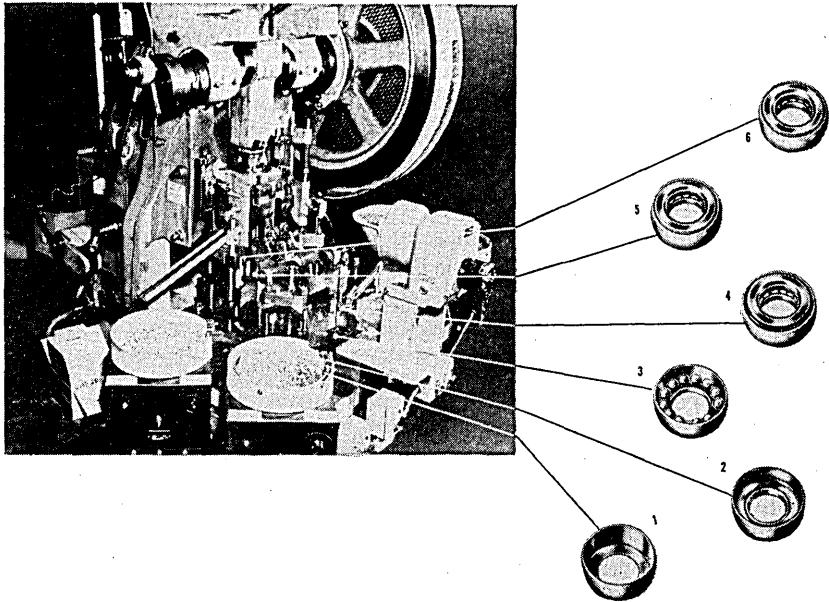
Standard press setup to assemble low-cost bearings (Courtesy New Departure Division, General Motors Corp.)
